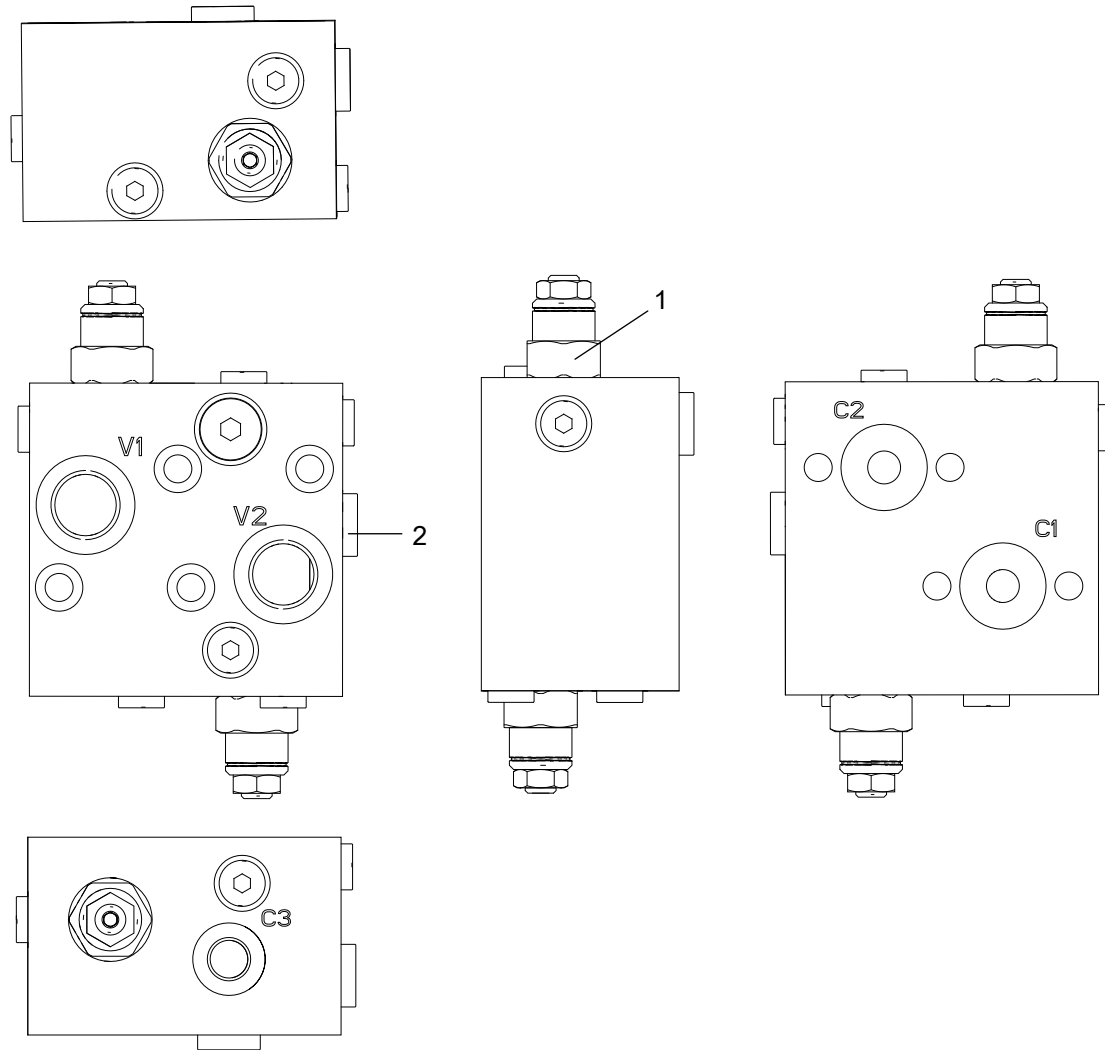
Slewing Cushion Valve (PN.202040003257)
